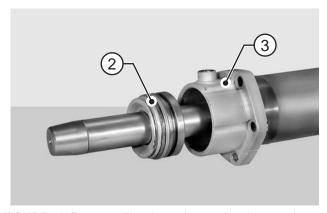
Remove all seals, anti-extrusion rings, and scraper rings from head (2), cylinder (3) and piston (5).
